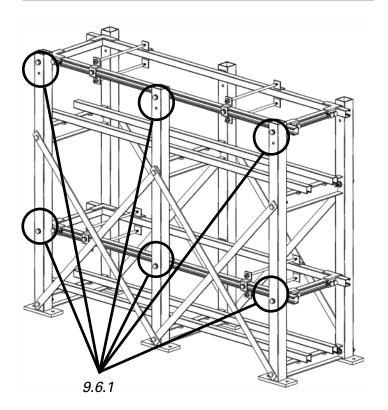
Typical side rail to frame assembly with spacer and shim placement shown, when applicable (Refer to Support Rail Assembly)
